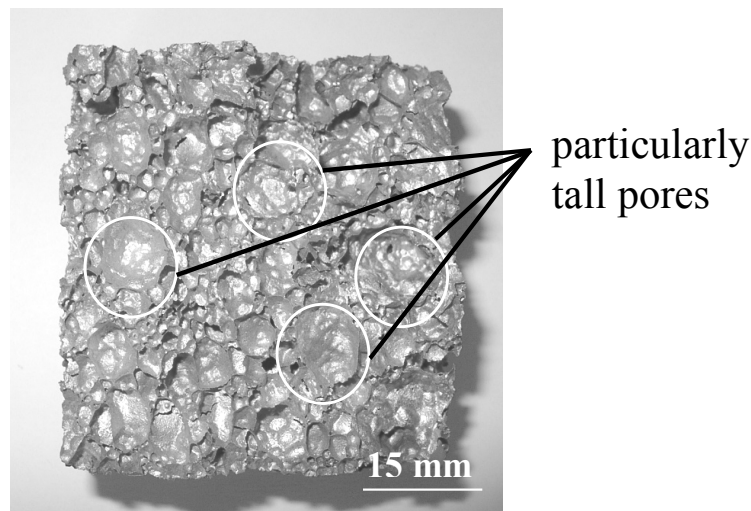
Fracture surface of a fatigue specimen containing large pores.
